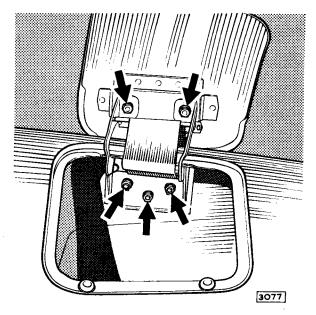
Removal of the fuel filler lid (R.H.)
